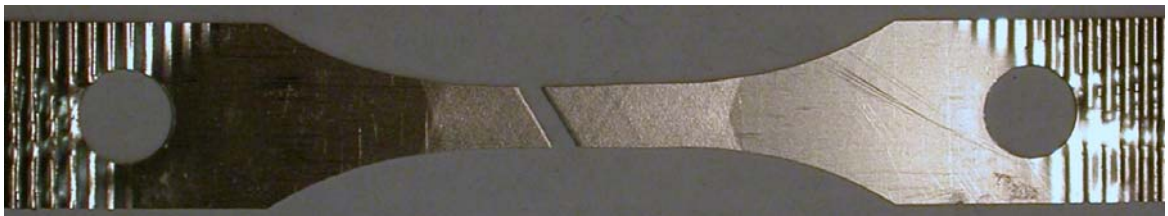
A tensile specimen showing the formation of Lüders bands in the gage section.
